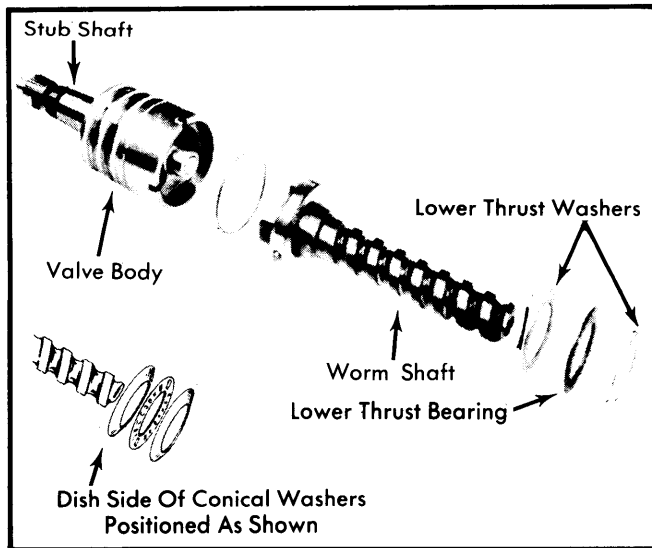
Reassembly of Valve Body and Worm Shaft Assembly
